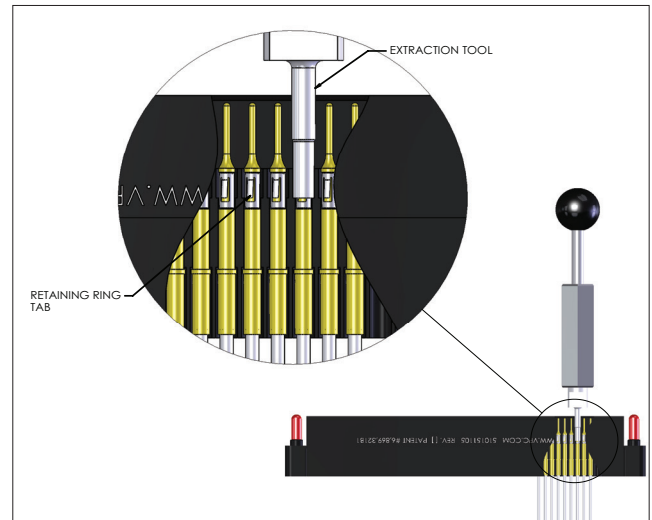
Figure B. Ensure extraction tool (p/n 910 110 111) is kept perpendicular to the module face to avoid damage to the contact or tool.
